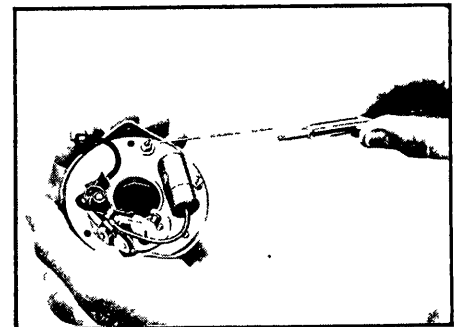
B Checking breaker plate friction with ounce scale. Delc - R my 1949 and later distributors
